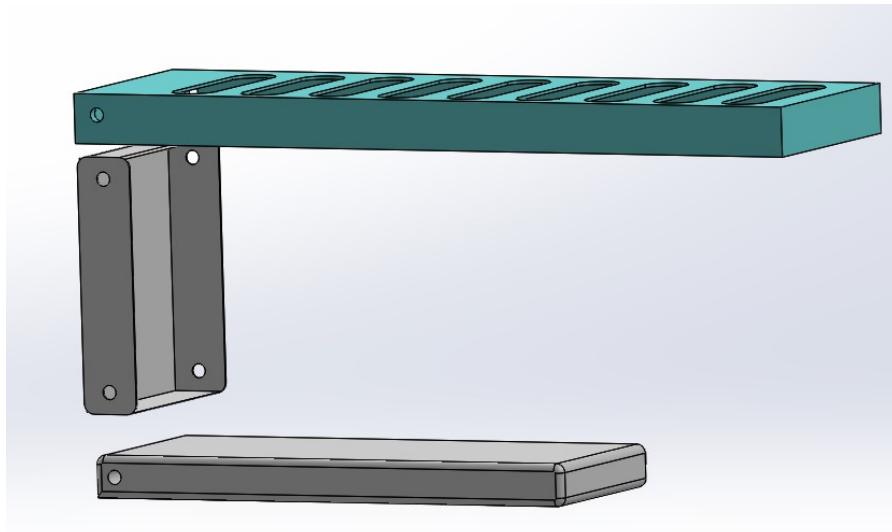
Ferrarer, Auston: Assembly Step 1
